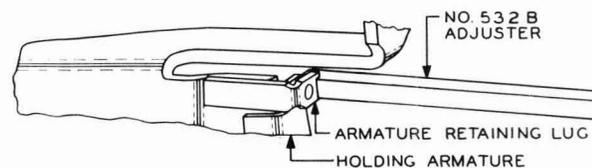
Fig. AE — Method of Adjusting Armature Retaining Lug of Vertical Units Having Lower Retaining Springs Only
